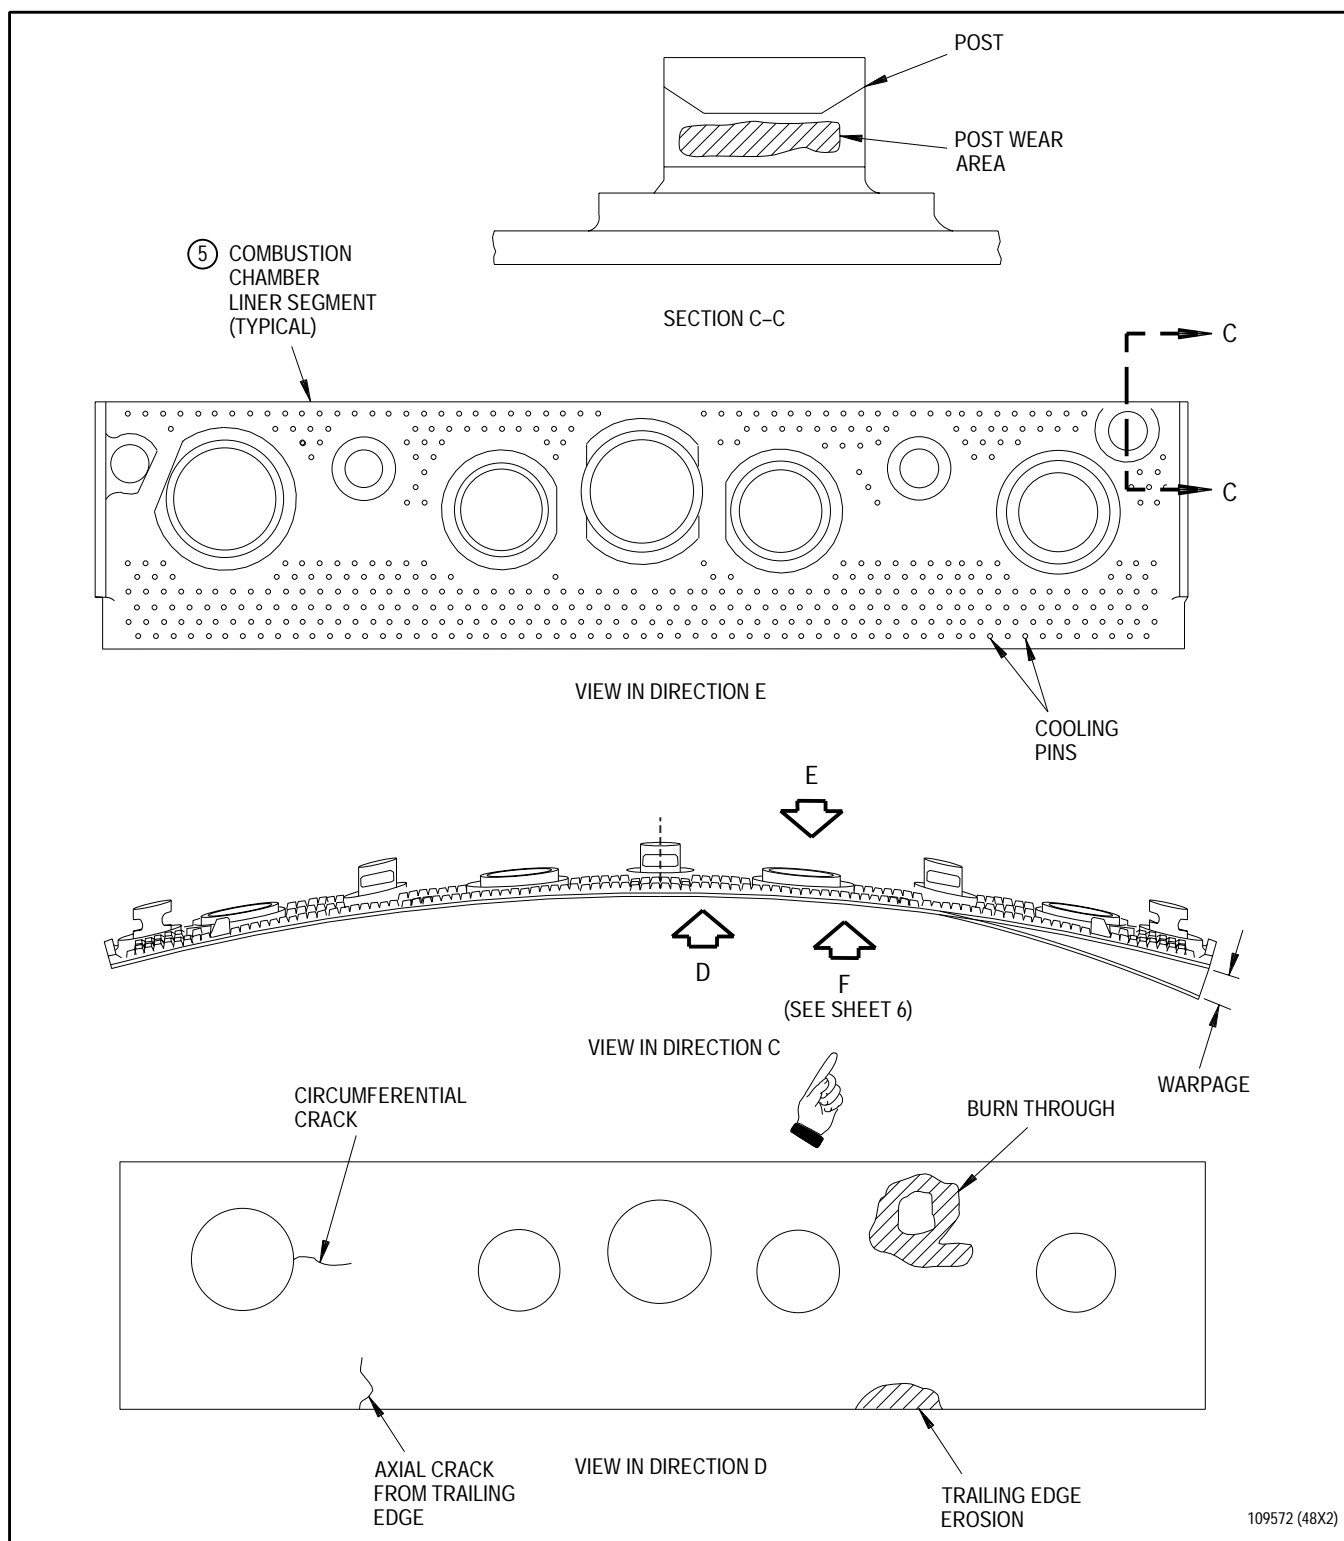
Combustion Chamber Assembly - Inspection (Sheet 5 of 7)
